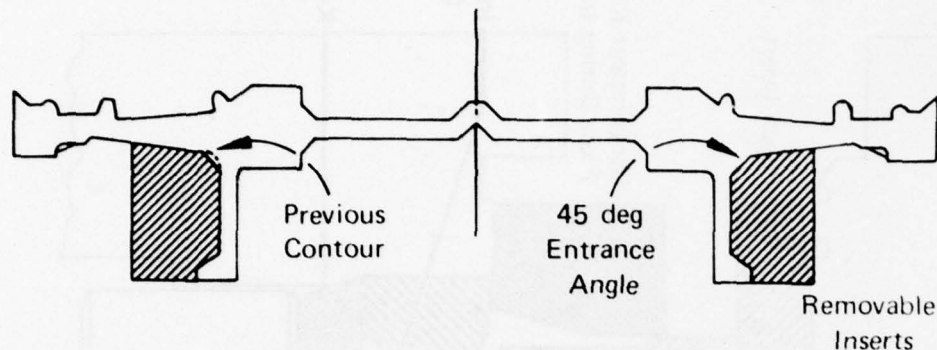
Subscale 1st-Stage Turbine Forging Configuration and Inserts
